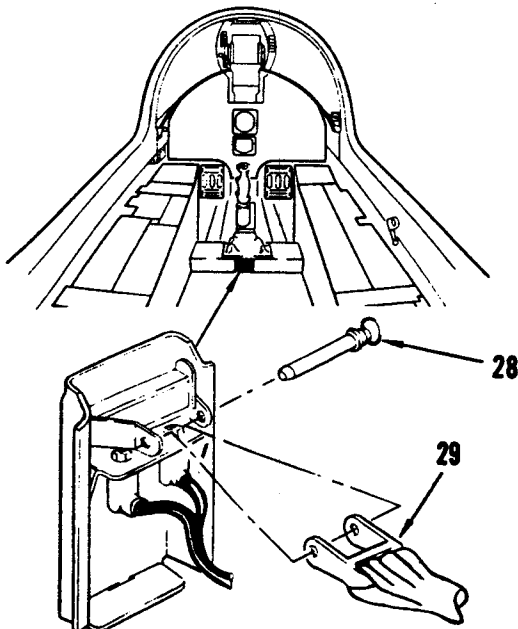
Ejection Seat Removal and Installation (Sheet 5)
